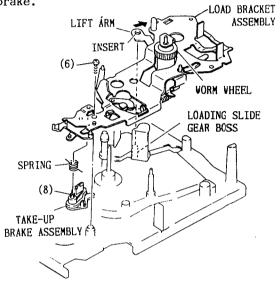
Load Bracket Assembly and Take-up Brake
